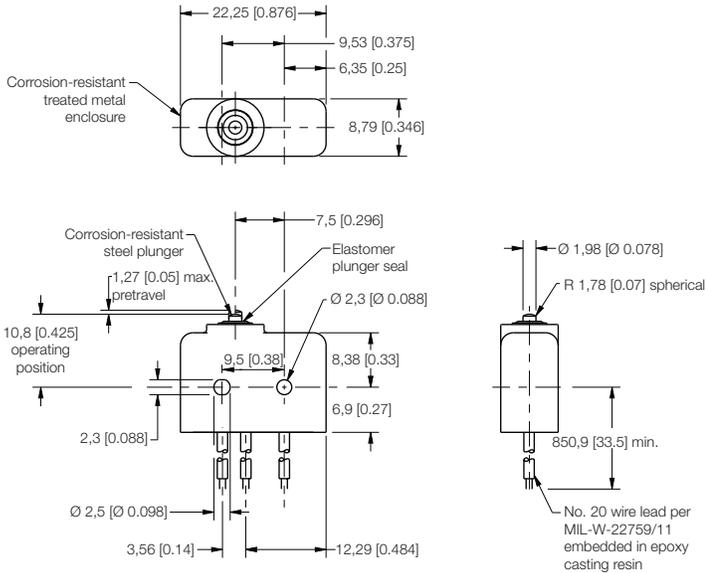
MICRO SWITCH SE Dimensions, Solder Terminal
